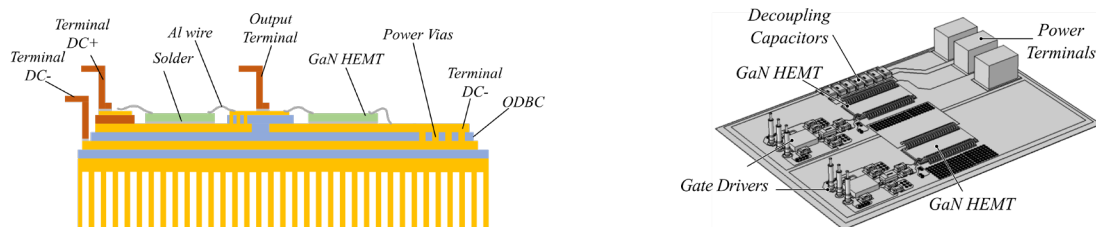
(left) Cross-sectional concept view of the integrated multilayer power module, and (right) CAD model of the module with power devices, integrated gate drivers, and terminals. DC = direct current; HEMT = high-electron-mobility transistor; and ODBC = Organic Direct Bonded Copper.
